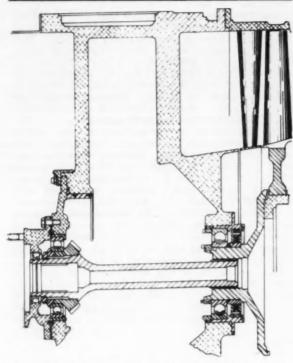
Contact-type oil seal without pressure balance located at compressor inlet end bearing
